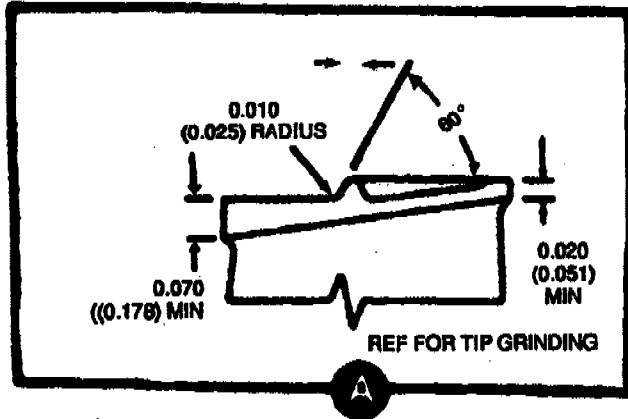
Power Turbine Rotor and Bearing Housing Assembly Inspection Locations (Sheet 3 of 4).
